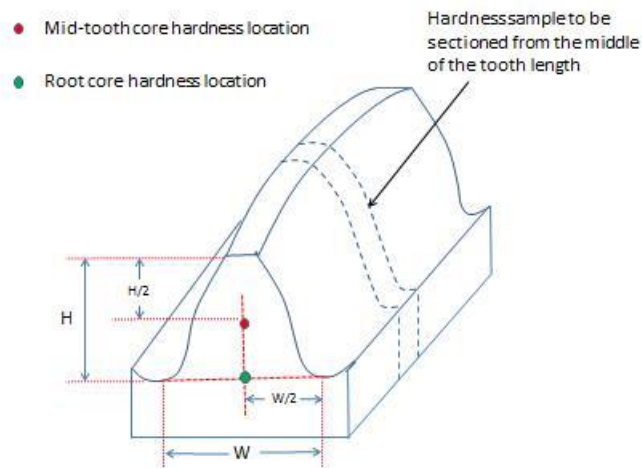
Schematic of tooth profile showing the locations of the core hardness measurements. The cut section shall be nearly perpendicular to the tooth flank surface and top land.
